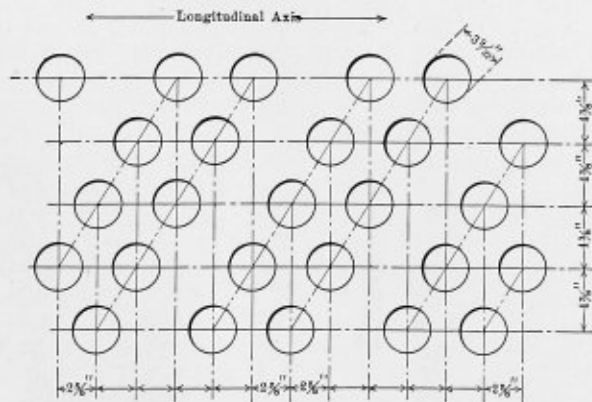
Special Spacing of Tube Holes in Drum of Watertube Boiler
